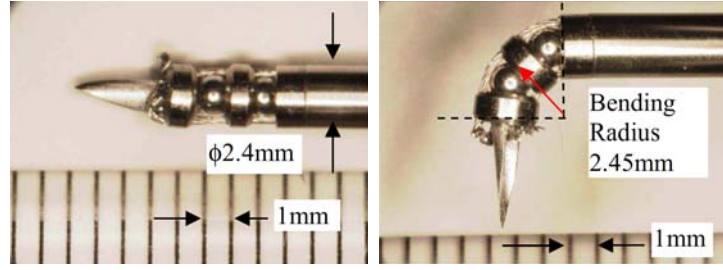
Segmented manipulator (2.4 mm diameter) using non-traditional joining technique [54].
